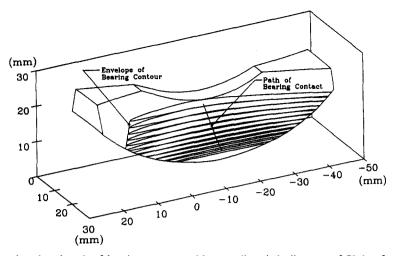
Enveloped and path of bearing contacts with a smaller pitch diameter of 73.6 m for oversize hob cutters.
